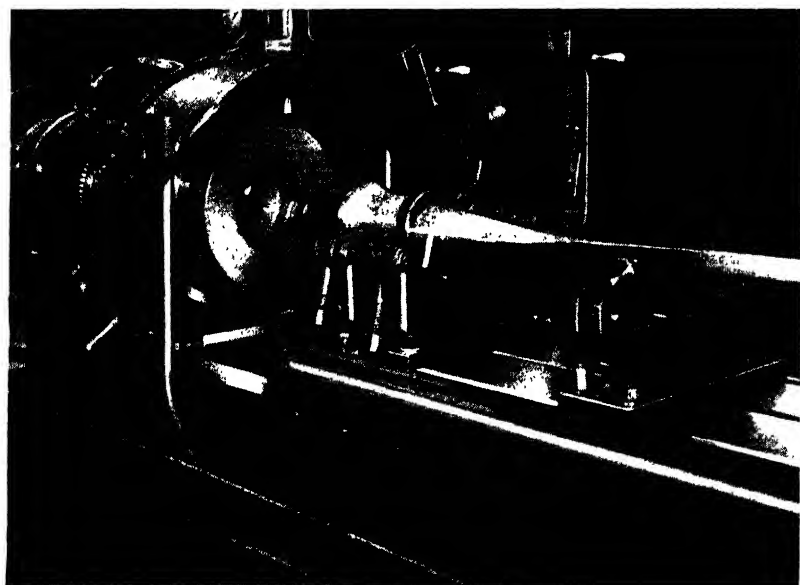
Form-milling and Facing Shank End of Propeller Blade
